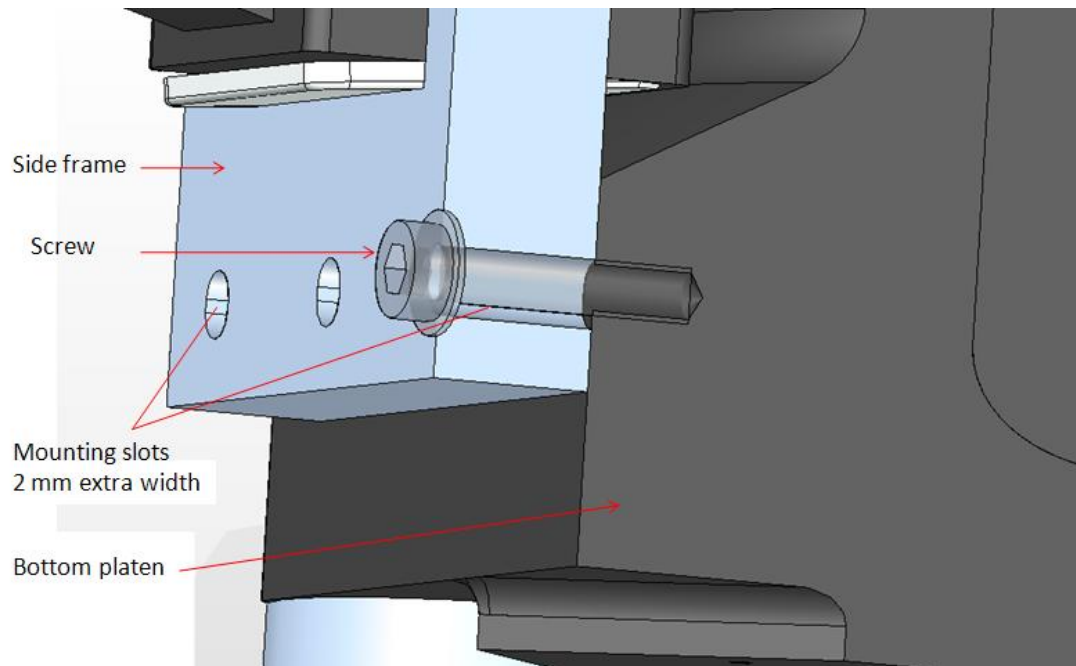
The optimized design of 2 mm longer screw slot at the bottom end of the side frame part.
